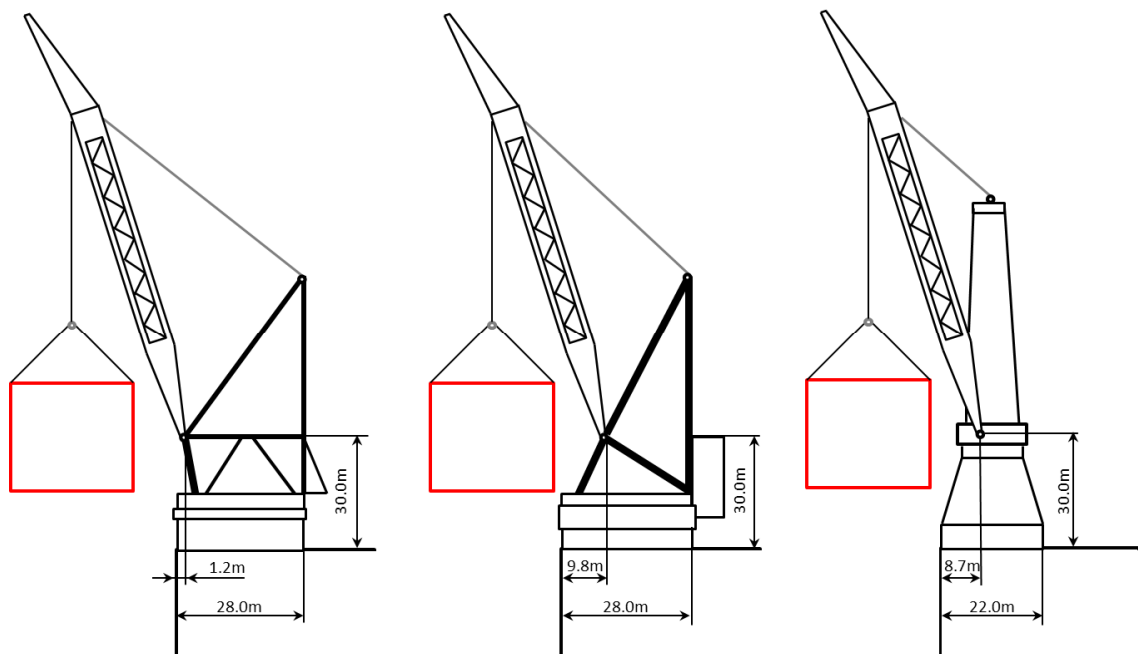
Boom hinge point locations, roller slew bearing A-frame crane (left) bogie slew bearing crane (center) and mast crane (right)
